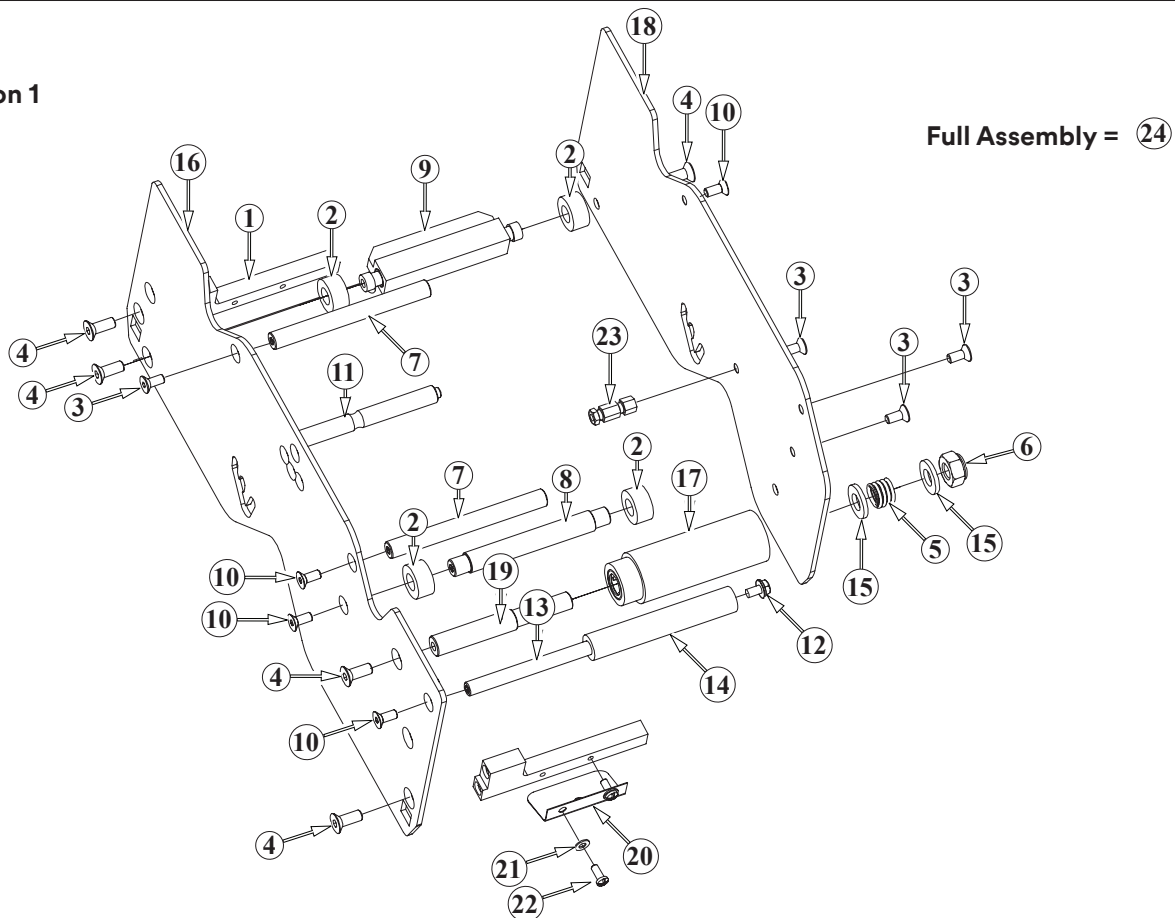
Lower Taping Head / Blade Guard Assembly
